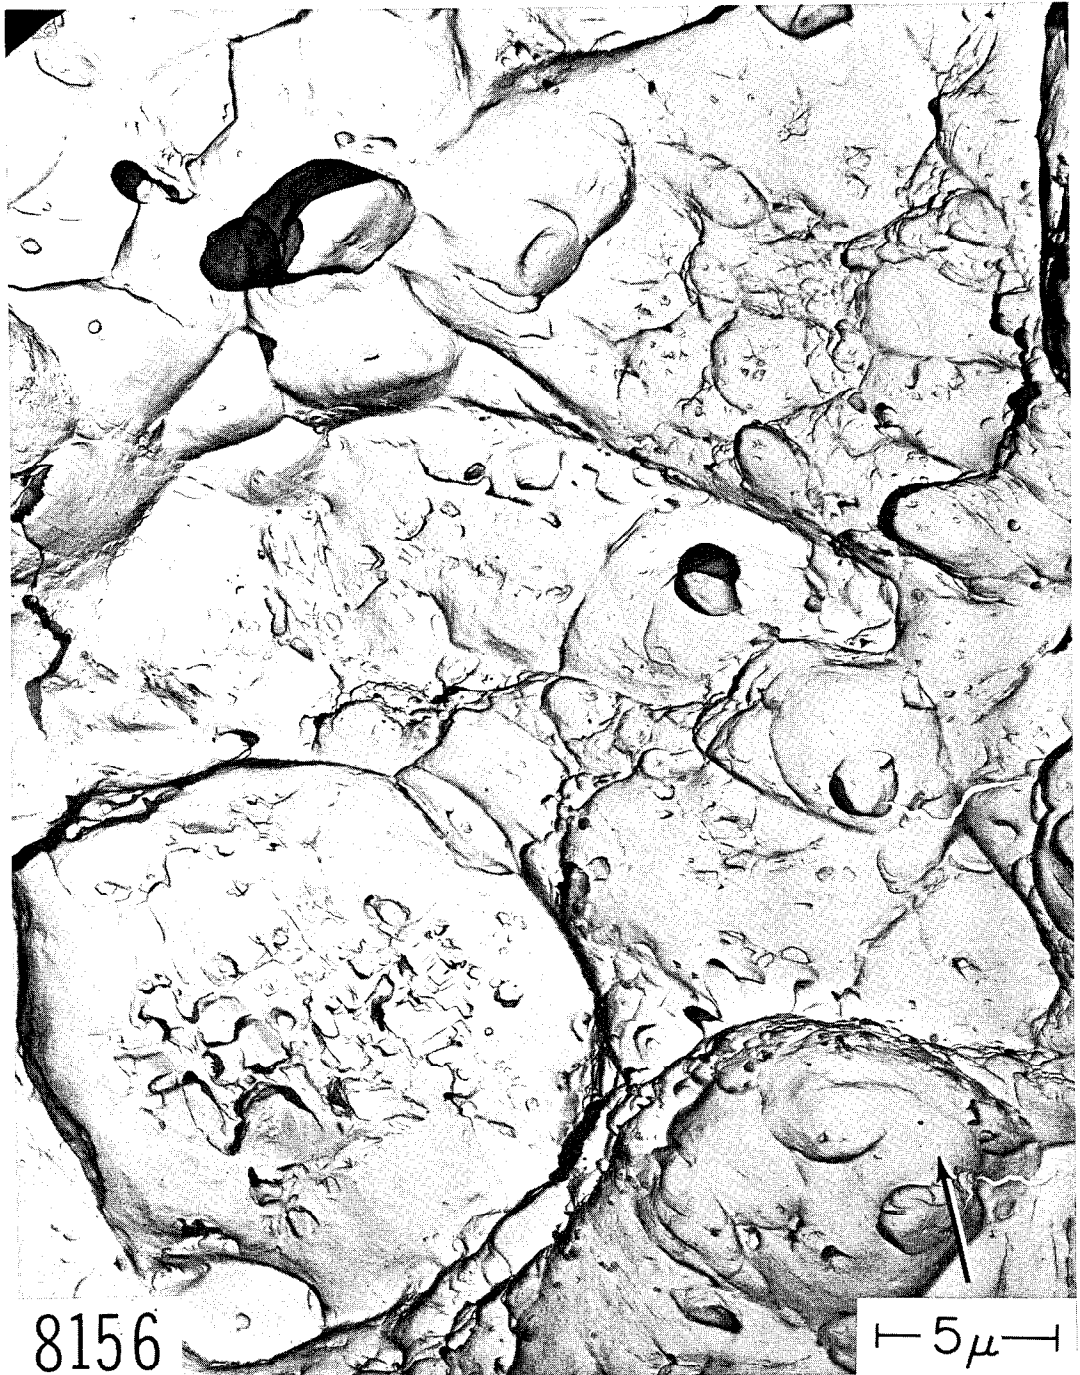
Dimples on the overload fracture surface in maraging steel weld metal. Cellulose acetate-carbon replication technique. Palladium shadowed. 6000X.
